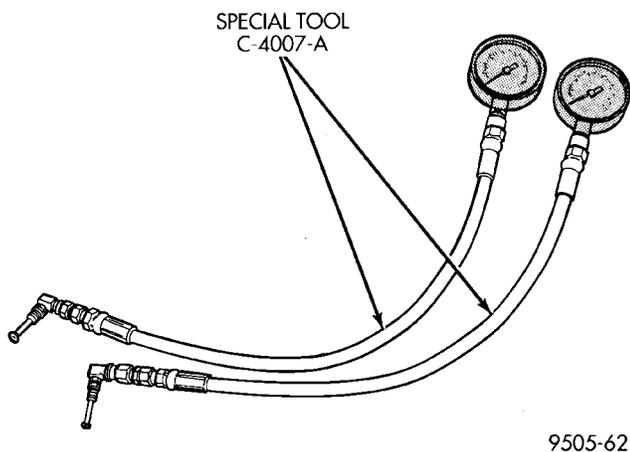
Proportioning Valve Pressure Test Gauge Set
